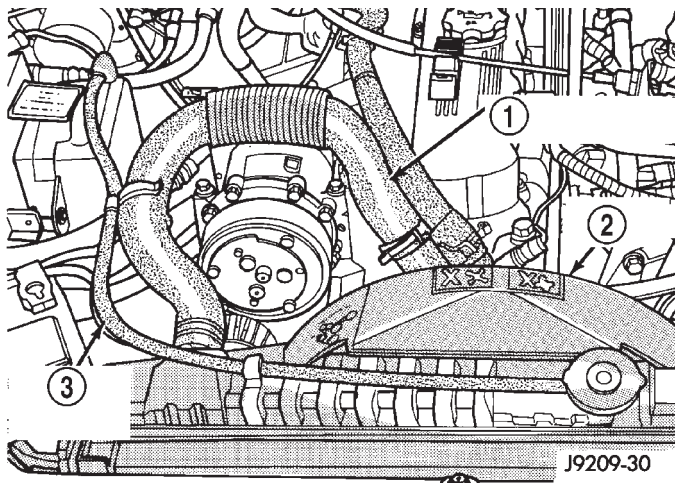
Upper Radiator Hose, Coolant Recovery Hose & Fan Shroud
